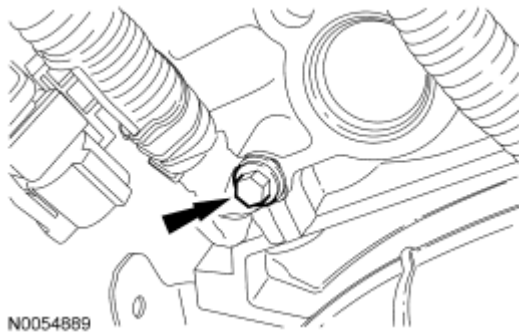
Identifying Wiring Harness Retainer Bolt From Rear Of LH Cylinder Head
